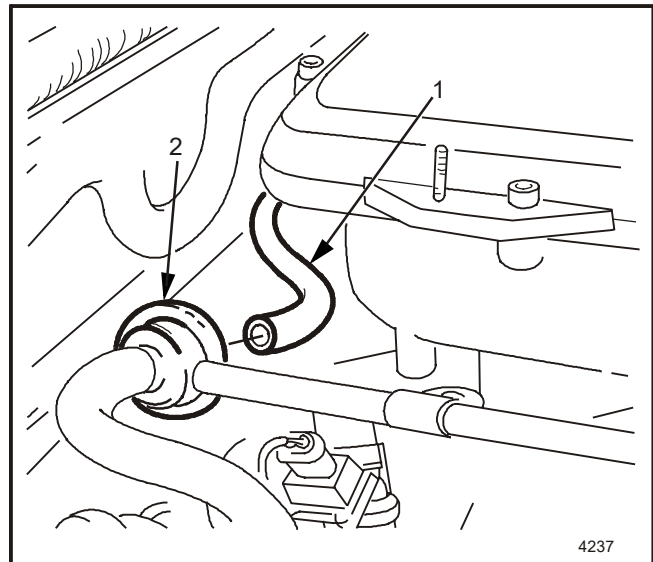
C1-3-44 V6 Engine Fuel Pressure Regulator Location
